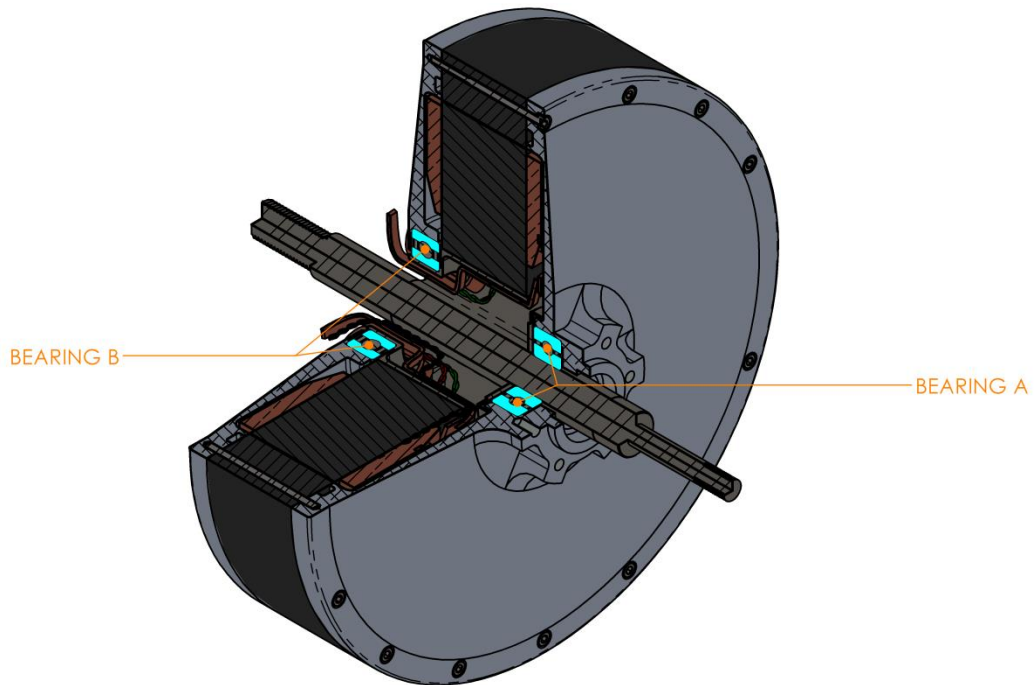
Main bearings – cross-section highlighted in cyan (12/16 CSRМ prototype)
